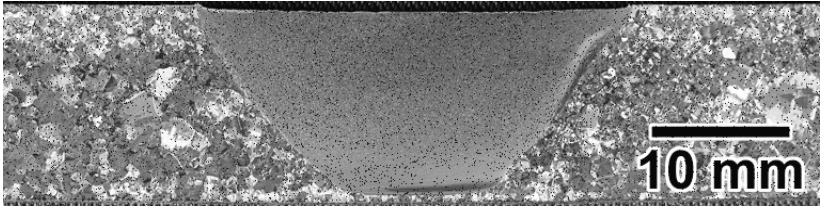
Transverse cross section of the Ti-5111 FSW weld.
